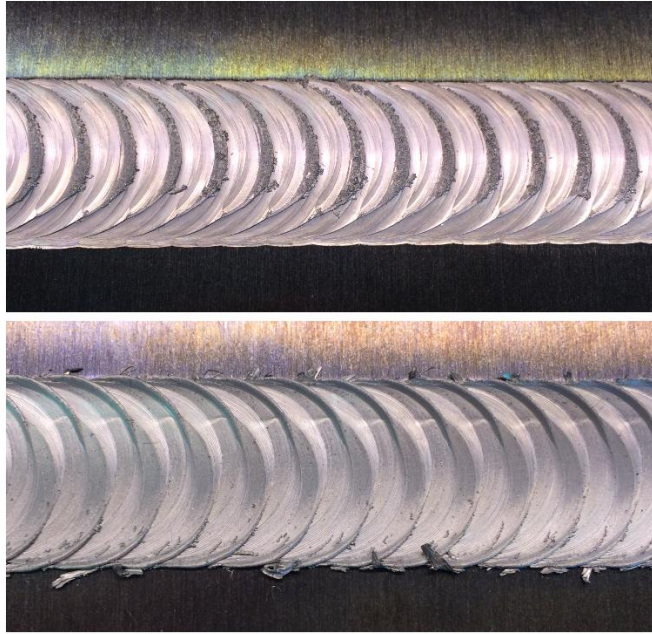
Surface Finish of Weaved Tracking Regime Welds (at R = 0.040 inch); Tapered Shoulder Tool (Top), Flat Shoulder Tool (Bottom)
